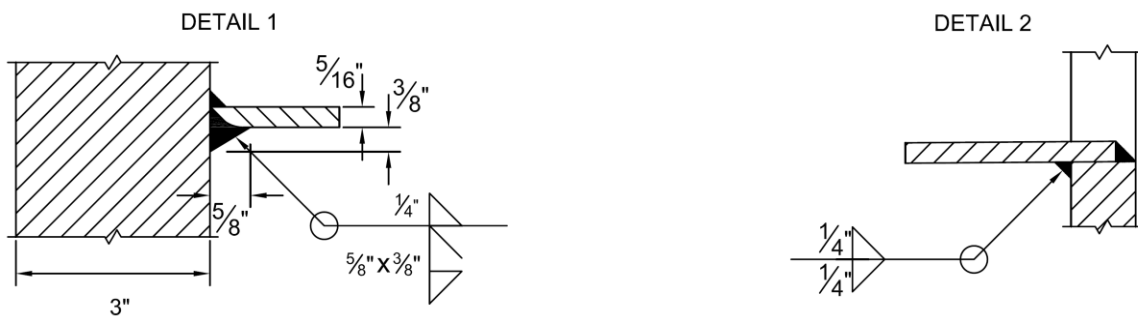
HMIP Fatigue Test Specimens of Primary Interest – Weld Details on Both Ends
